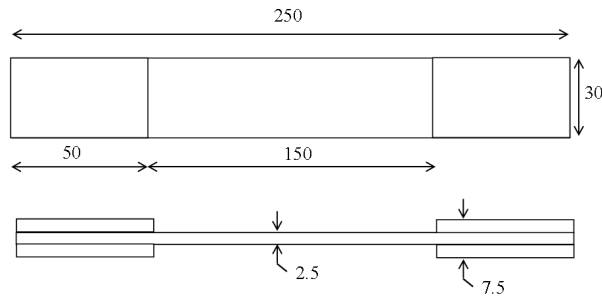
Dimensions of the used tensile coupon, equipped with end tabs.
